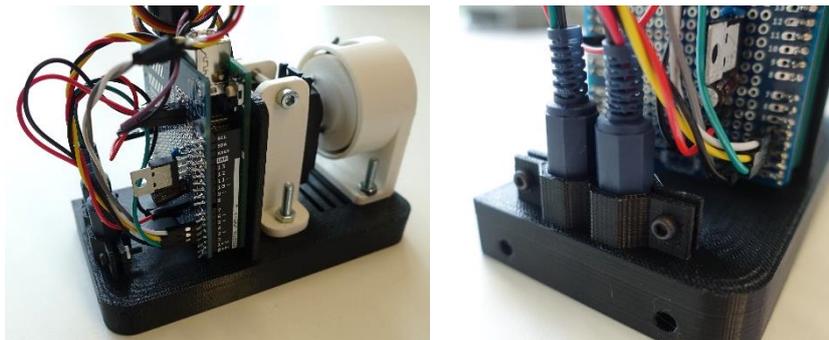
Actuator box assembly without lid (left) with detail on clamping of AUX female connectors (right).
